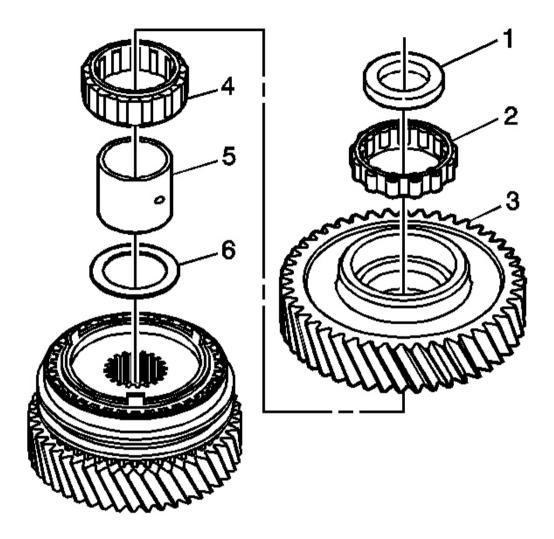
Exploded View Of 1st And 2nd Gear Assemblies Courtesy of GENERAL MOTORS CORP.
